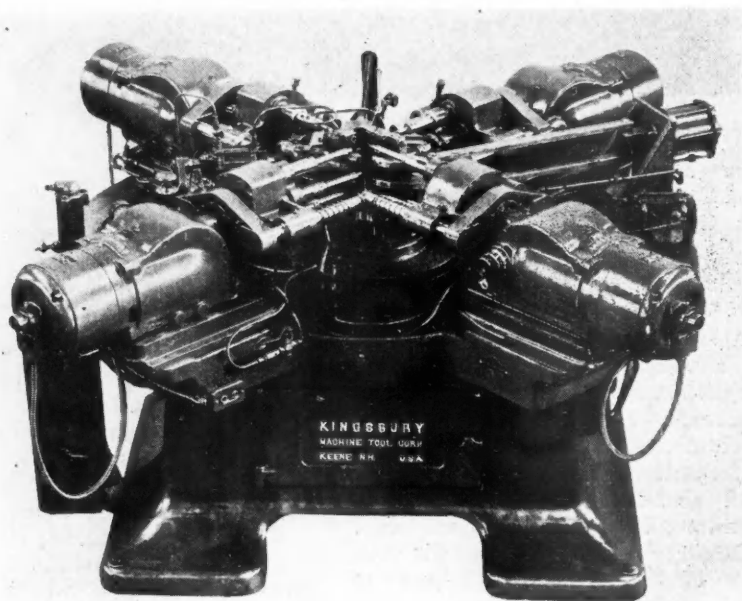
Kingsbury recently built this more complex way-type machine used to spot-face five holes in the housing shown in Fig. 4
